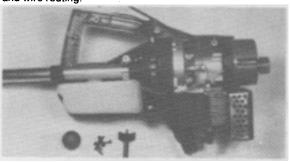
Trimmer shown with throttle, ignition switch and gas tank disconnected.
